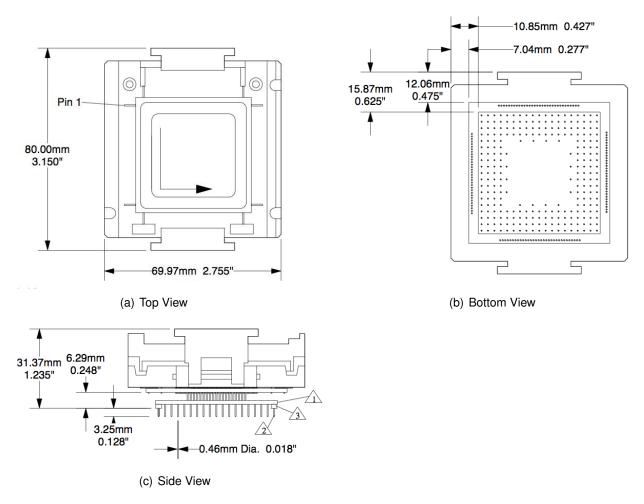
ZIF socket used for mounting FM ETM on a PCB.
